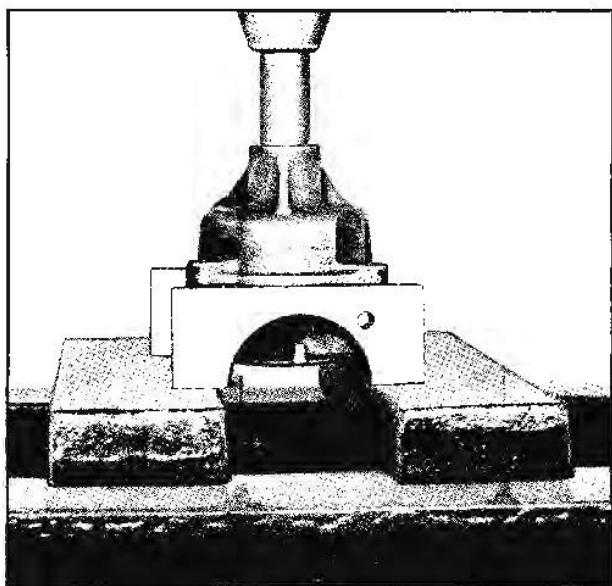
A-20 Pressing Shaft, Bearing and Impeller Assembly From Pump Housing
